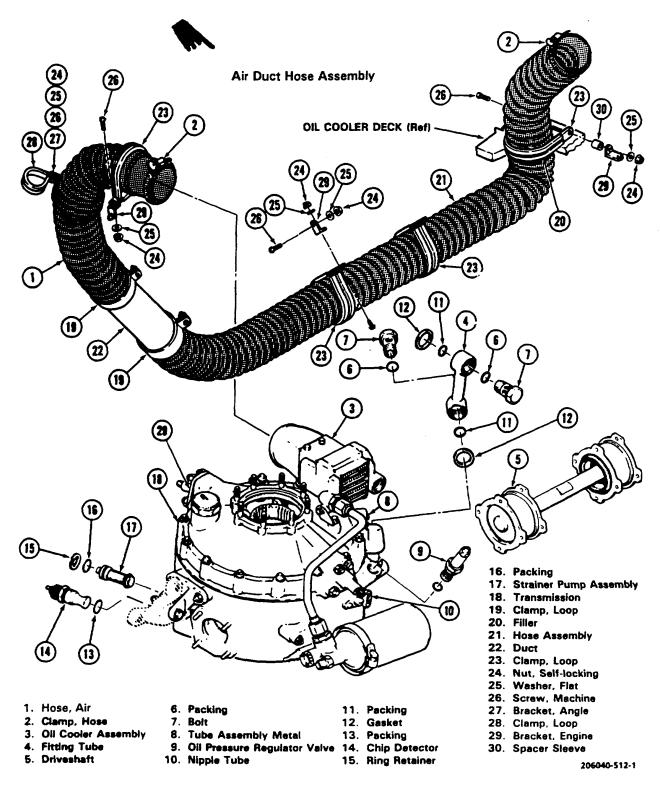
Transmission External Components (Sheet 1 of 3)
